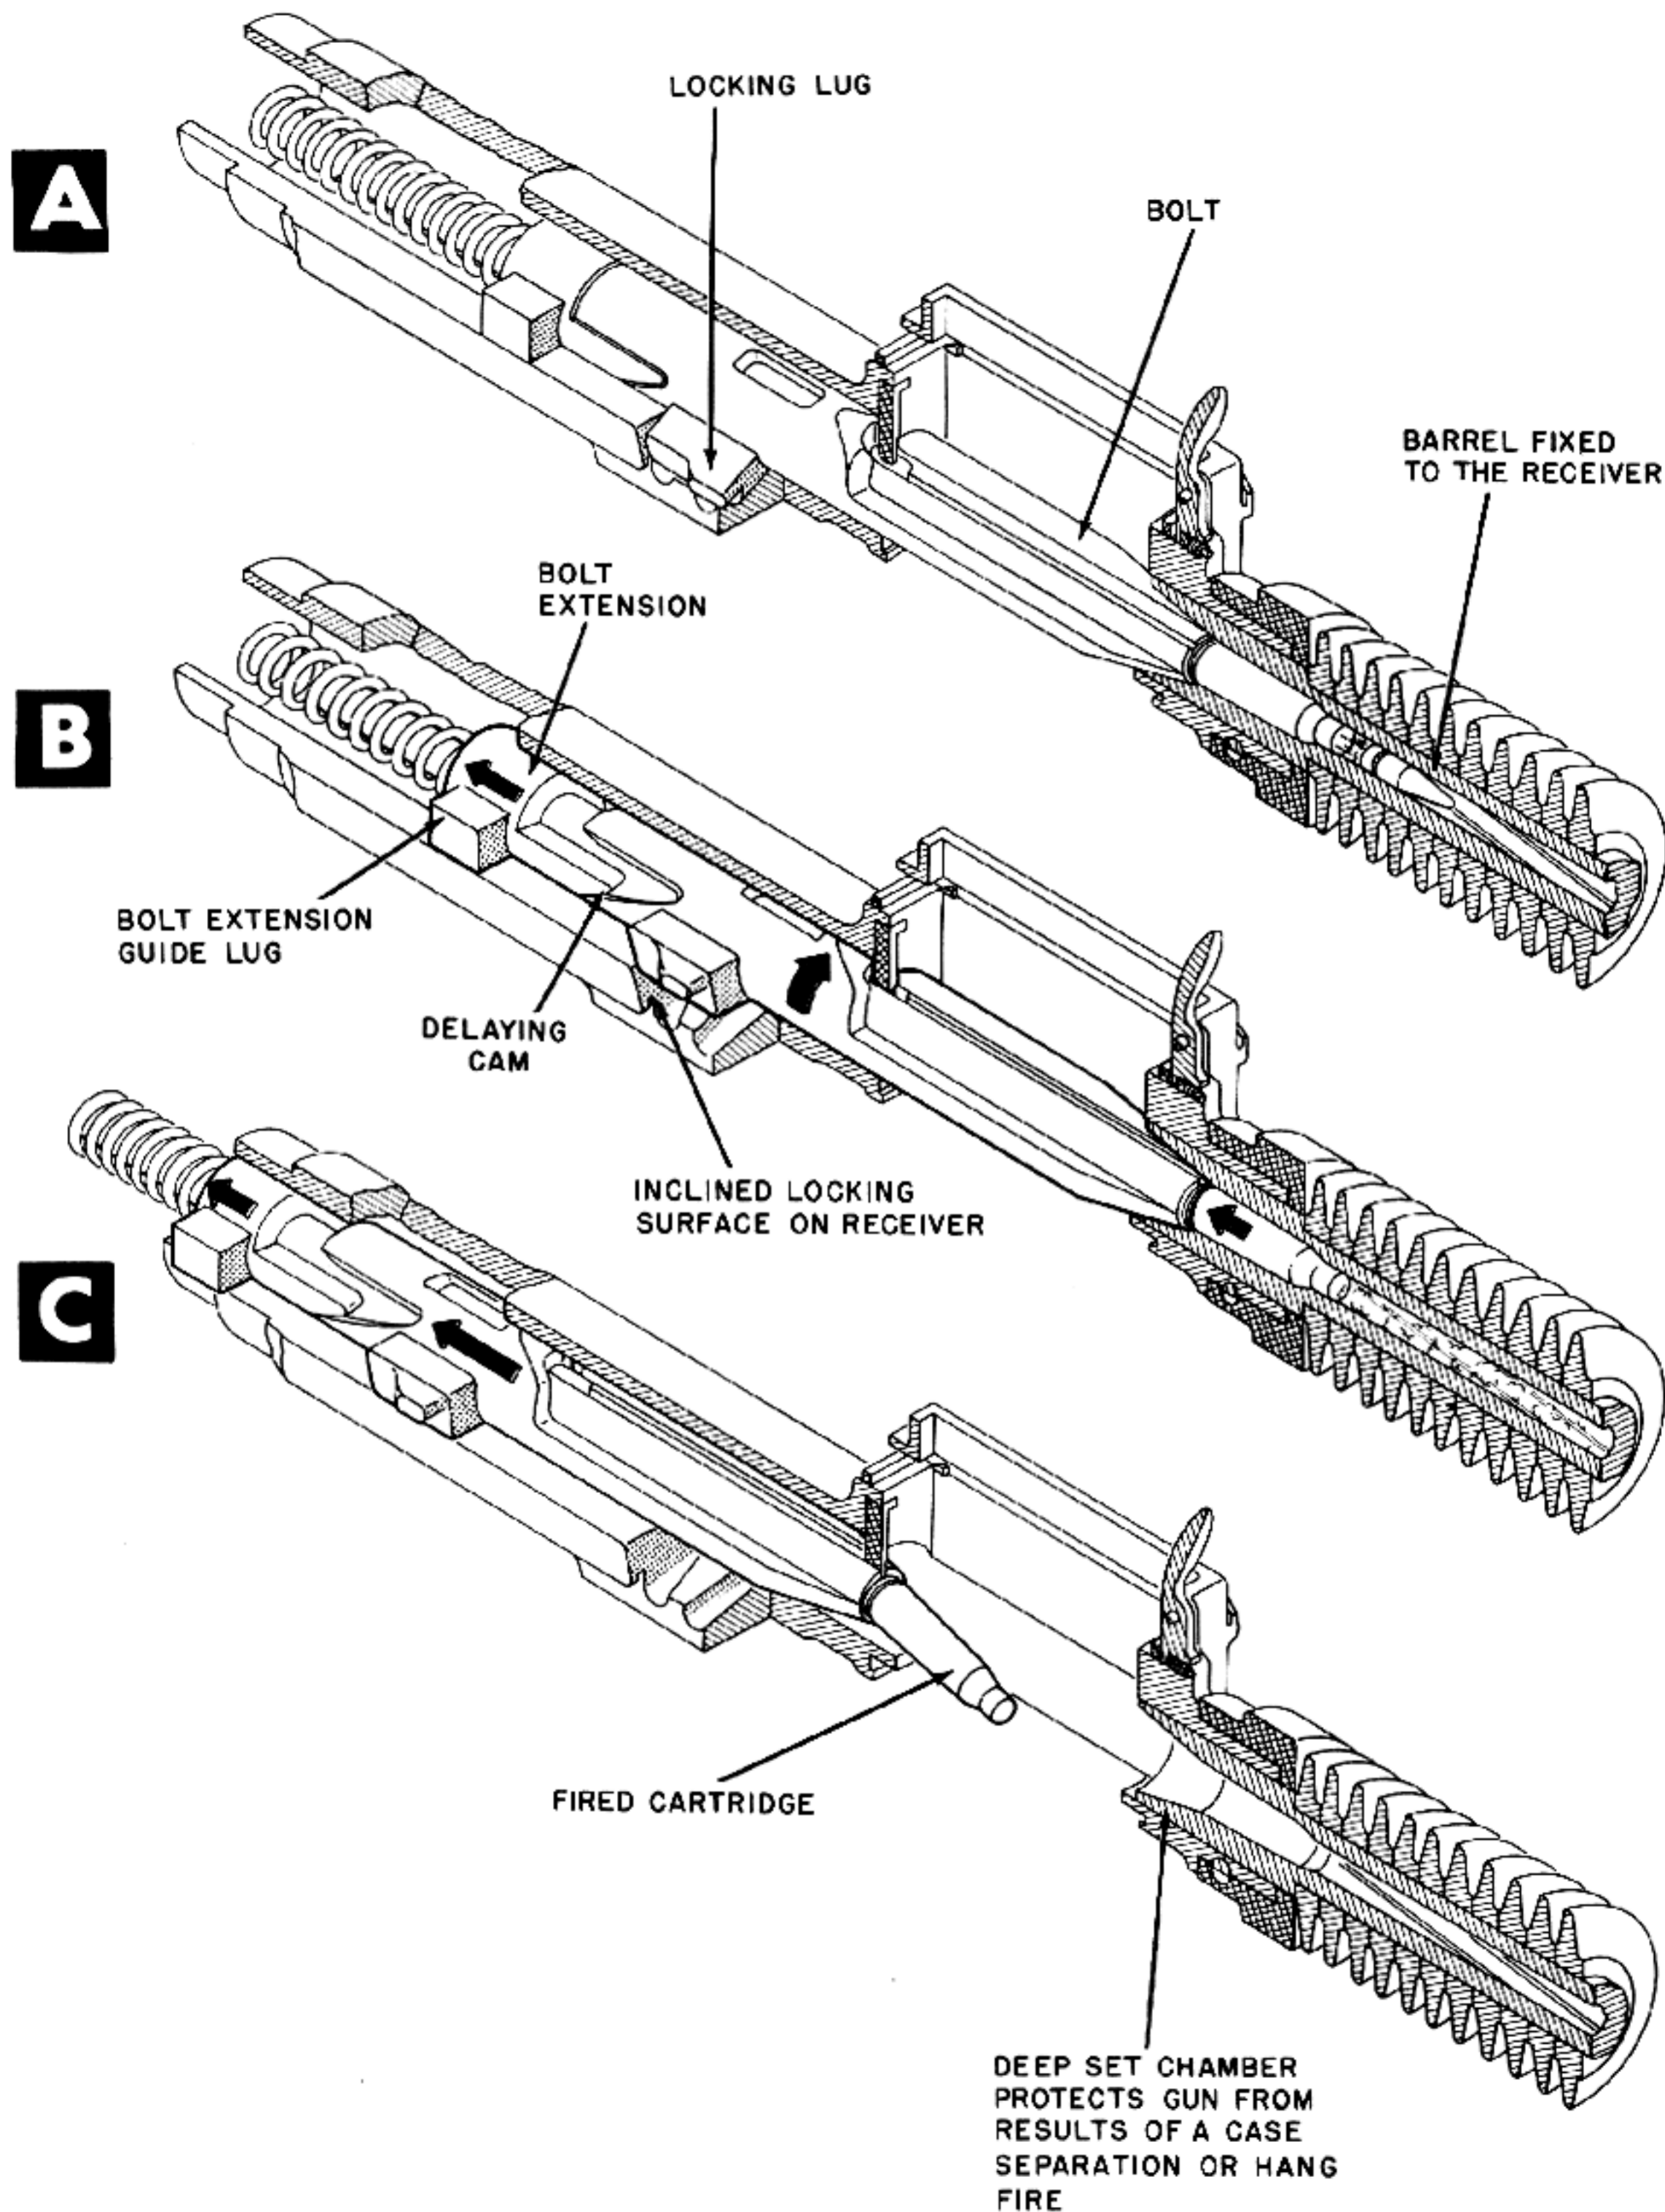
Bolt Is Not Locked; It Is Merely Delayed by Inclined Surfaces.
